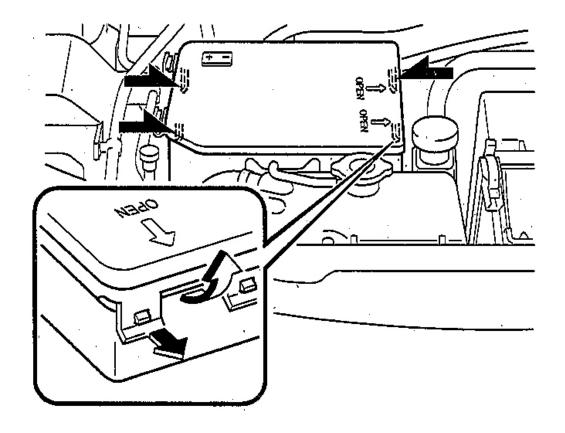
View Of Right Side Battery Cover Courtesy of MAZDA MOTORS CORP.
